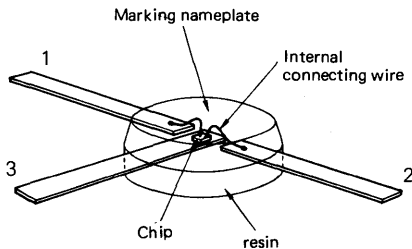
Interior Construction of 3-Lead DISKMOLD Transistor
